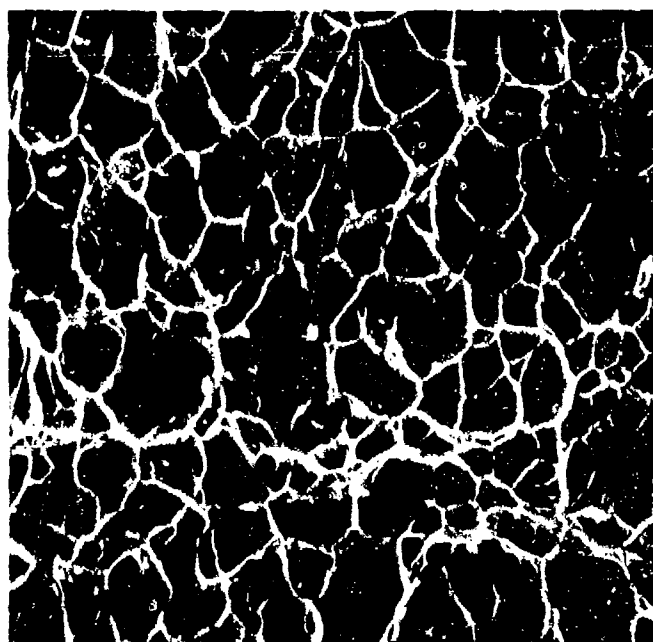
Transition region on tensile fracture surface of an A-514 weldment, 3750x.
